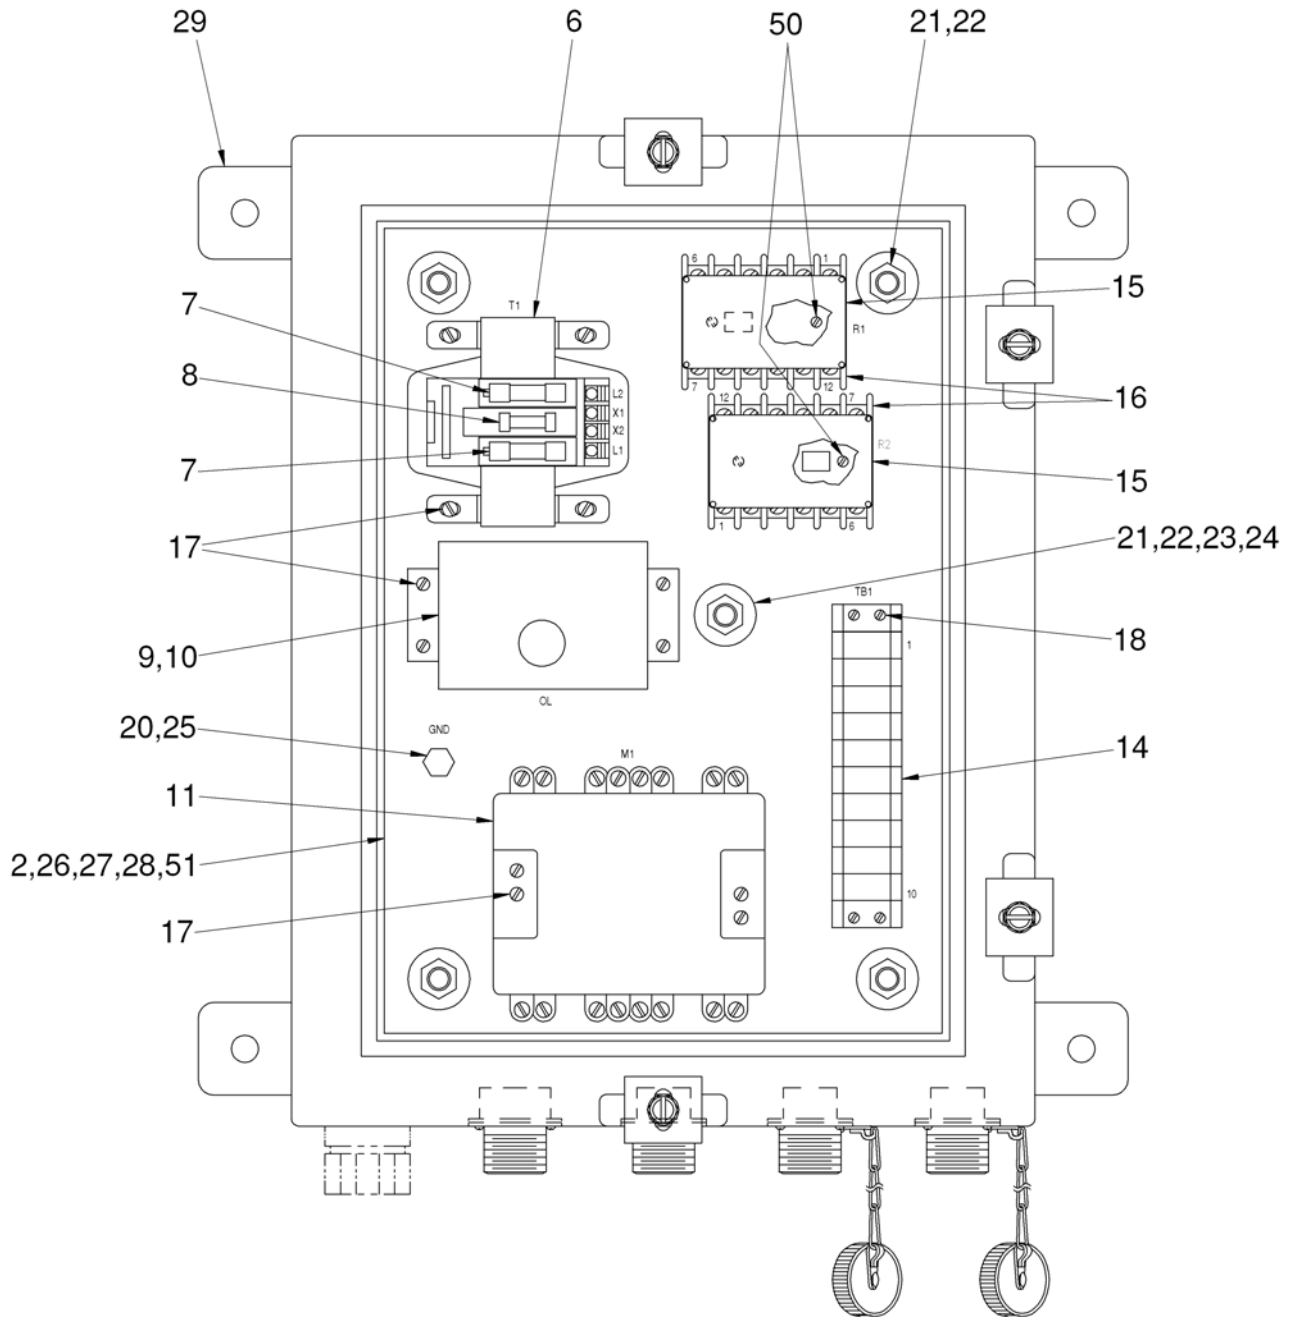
Cooling Unit Electrical Controller Assembly (sheet 2 of 2)
